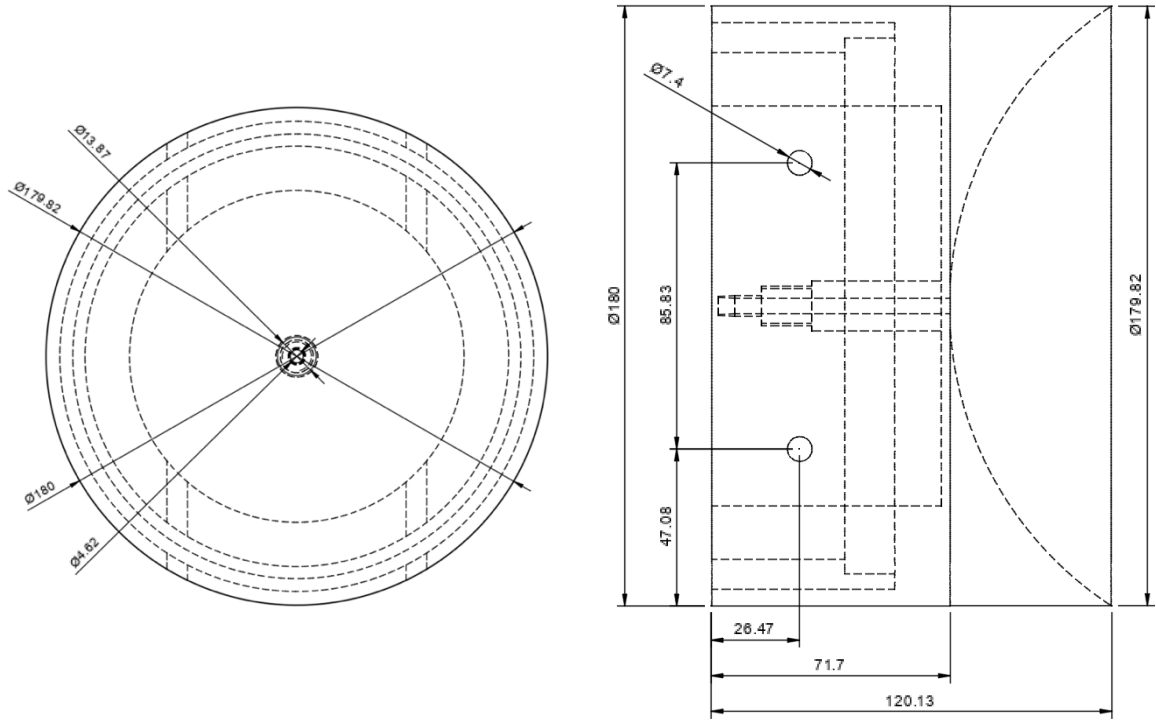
Detail 2D drawing of the head of the lower section. Left side is the top view and right side is the side View(unit in mm).
